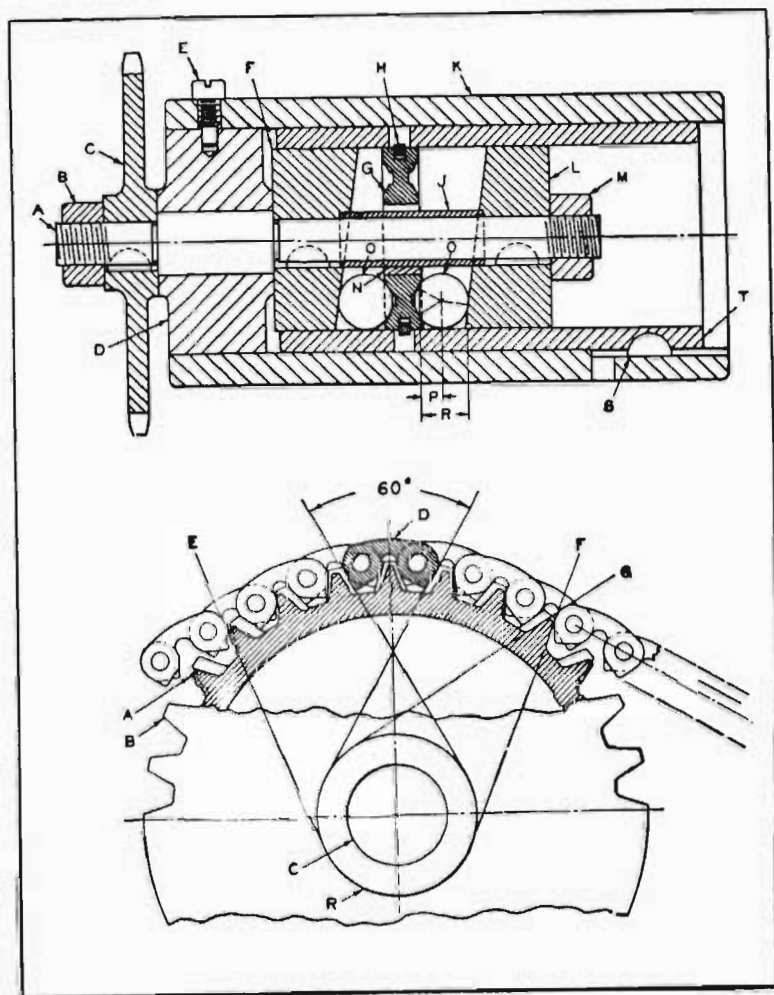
(Top) Mechanism for Converting Rotary into Reciprocating Motion. (Bottom) Single-chain Differential Drive with Standard Sprocket A and Special Sprocket B.
